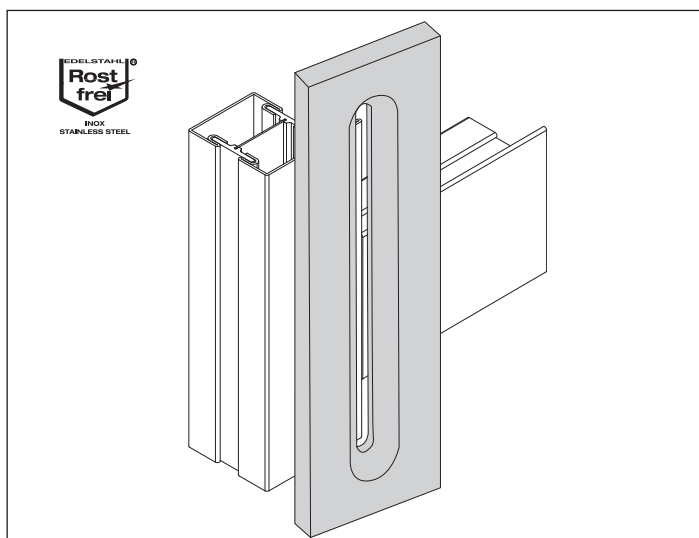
Use the copper welding gauge on the outside of the profile in the T-joint area
